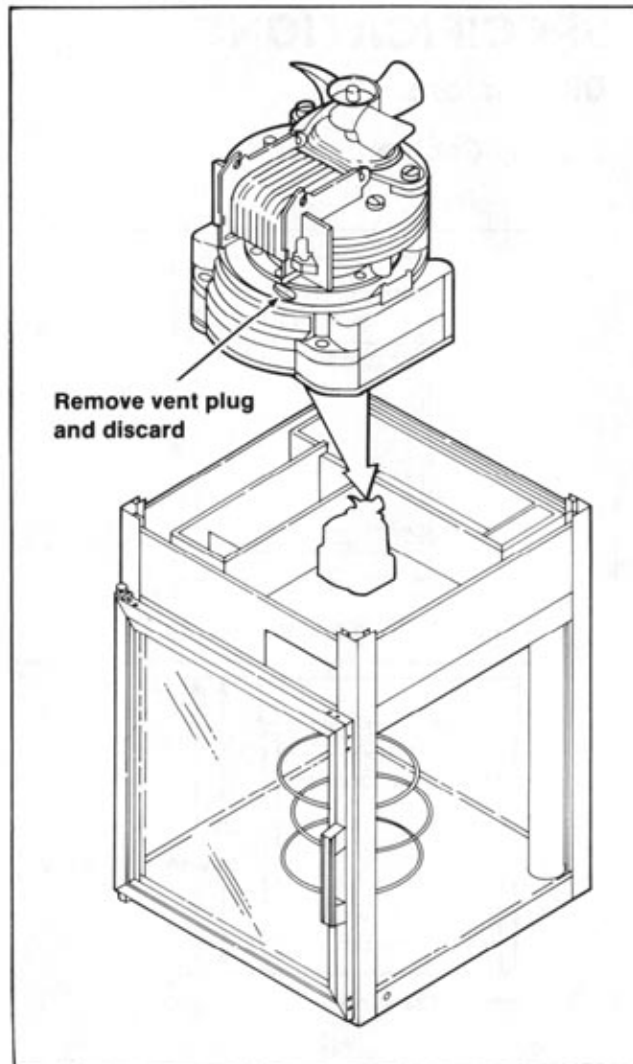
Gear Motor Vent Plug Removal—Models with Revolving Display
